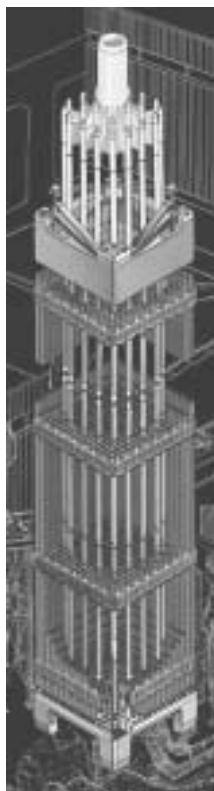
Sketch of a PWR nuclear fuel assembly from Westinghouse, courtesy of ref. [10].
